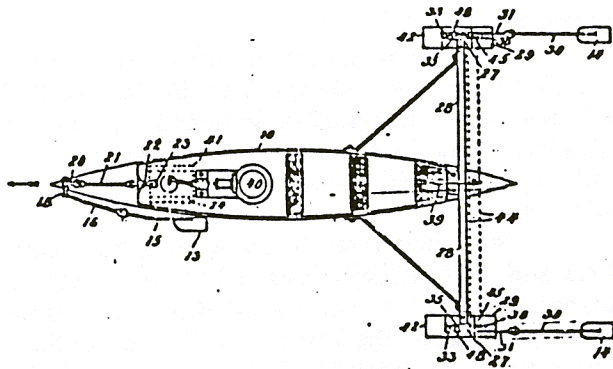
Patent Drawing of Meacham's Beam Craft
